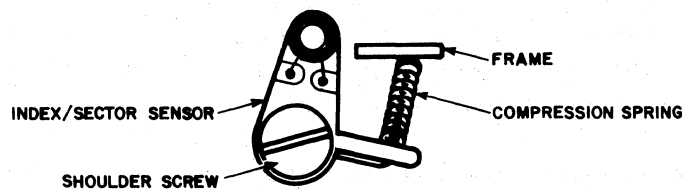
INDEX/SECTOR SENSOR ASSEMBLY REPLACEMENT
